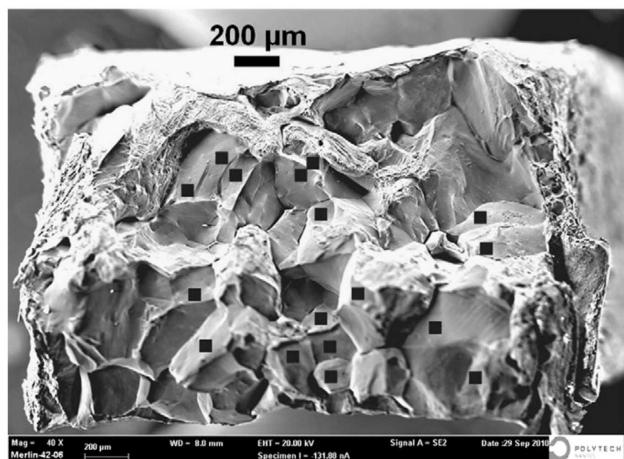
Fracture surface of the specimen annealed 75 min at 750°C and then fractured by tensile test in liquid nitrogen. The black squares indicate the analyzed areas.
